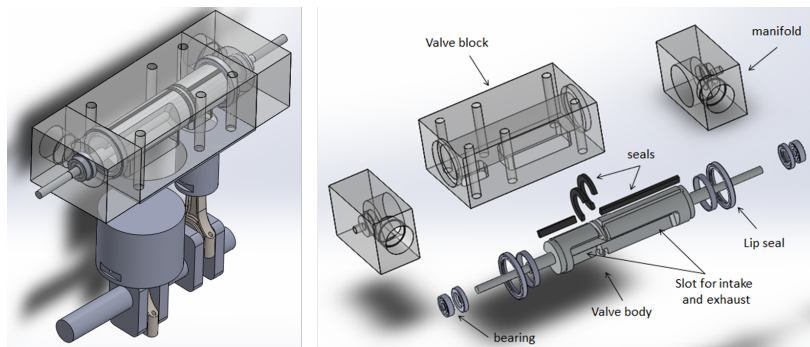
Left: valve block assembly on cylinder head. Right: exploded view of the valve.
